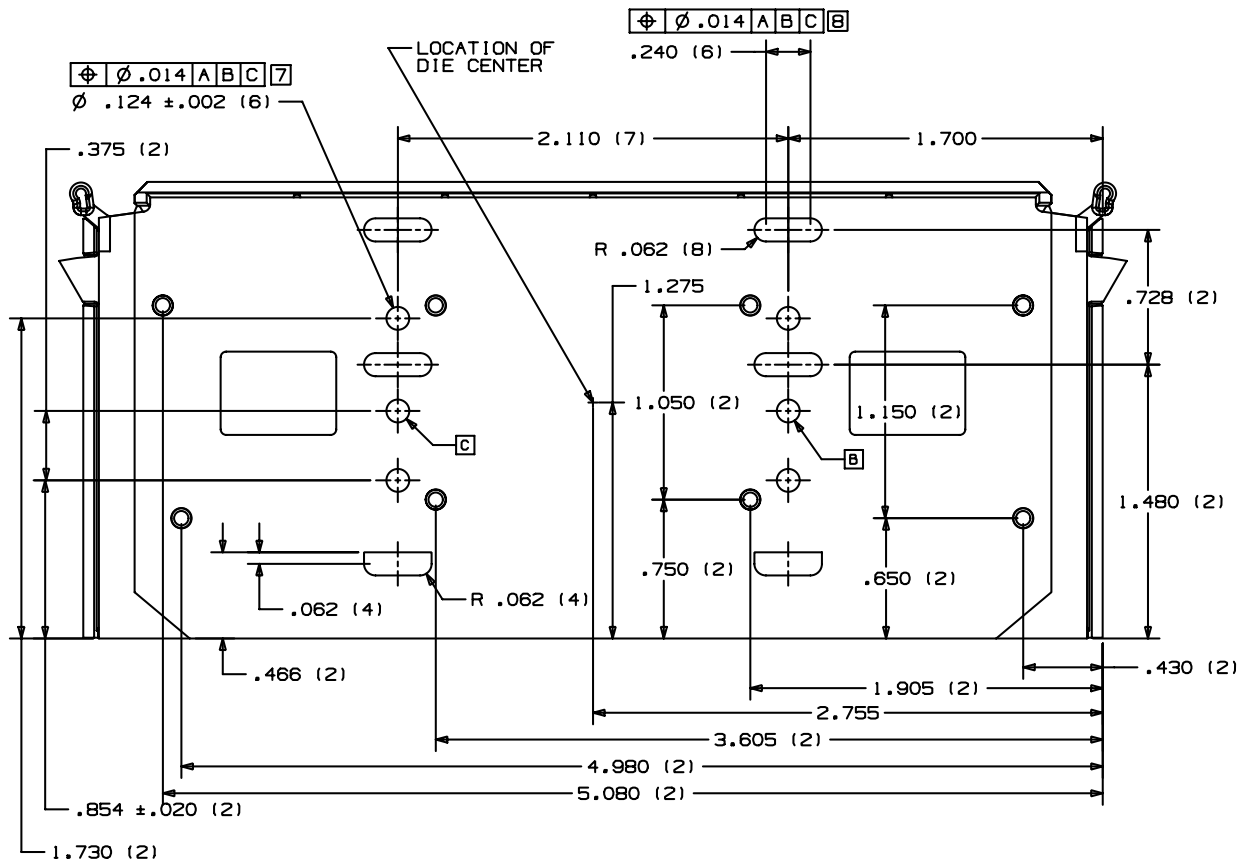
AMD Athlon™ Processor Module Dimensions—Plate Side View
